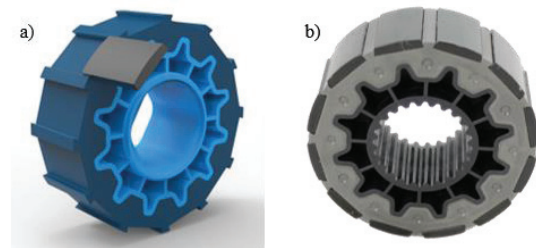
a) Visualization of the magnet carrier consisting of two injection molded components: SMC (dark blue) and PA (light blue), b) Depiction of a single rotor disc with mounted magnets but without fiber bandage.
